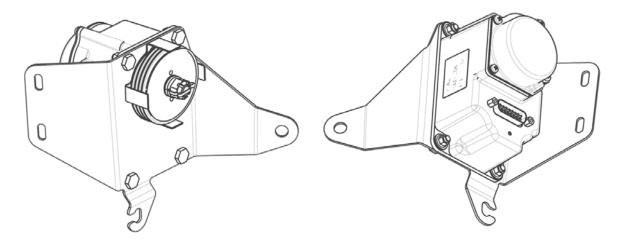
ROLL SERVO SUBASSEMBLY
